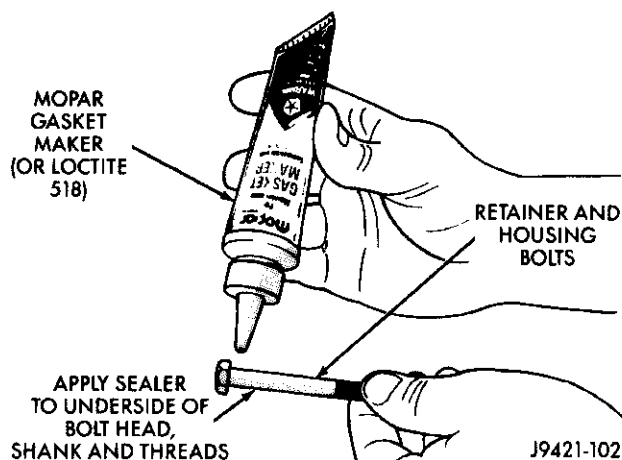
Applying Sealer To Retainer And Housing Bolts
